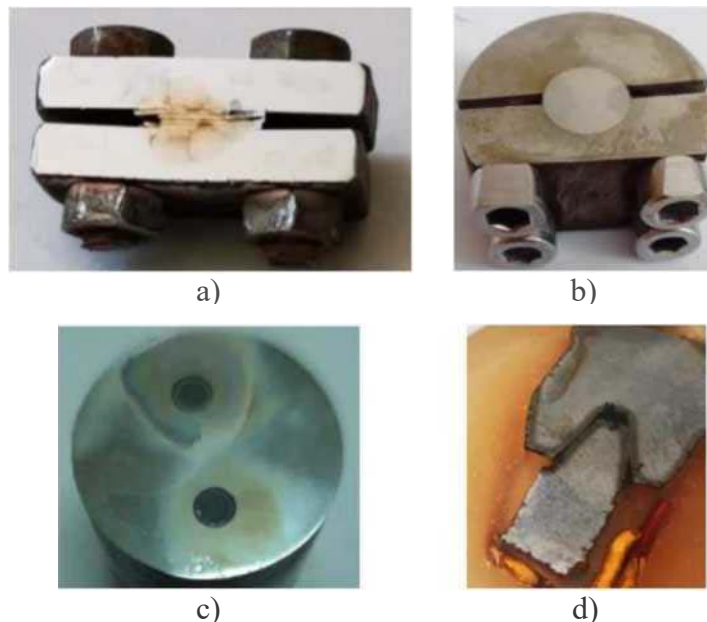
Microsections of samples with different geometry shape and thin diffusion layers: a-flat specimens; b- cylindrical samples; c- small bushings; d- gears
